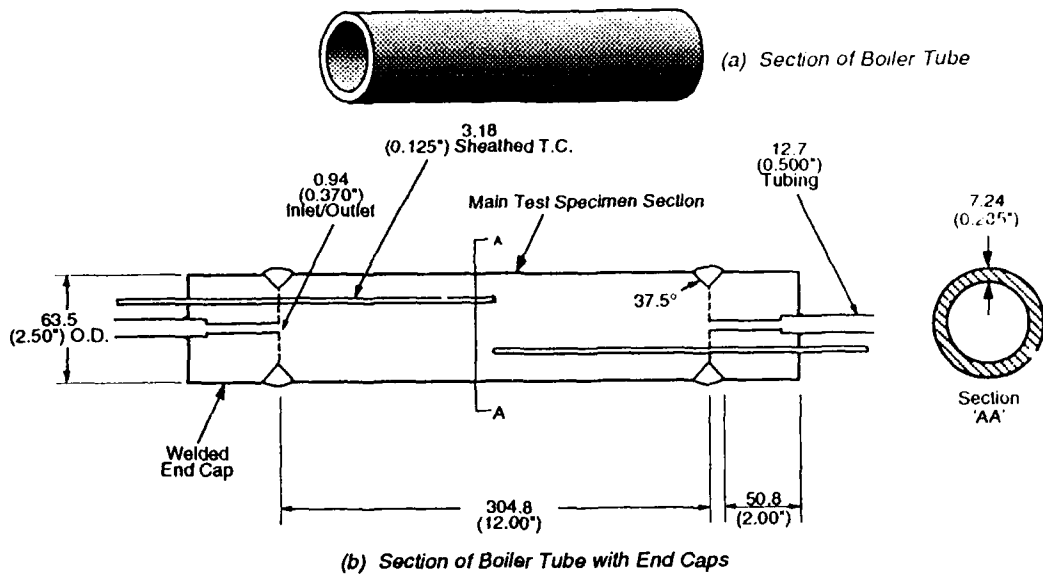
Schematic of boiler tube sample for corrosion fatigue tests (dimensions in mm (inches))
